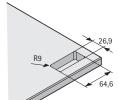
Cut out for installing LegaDrive Touch Basic Inlay handset with rubber fins
